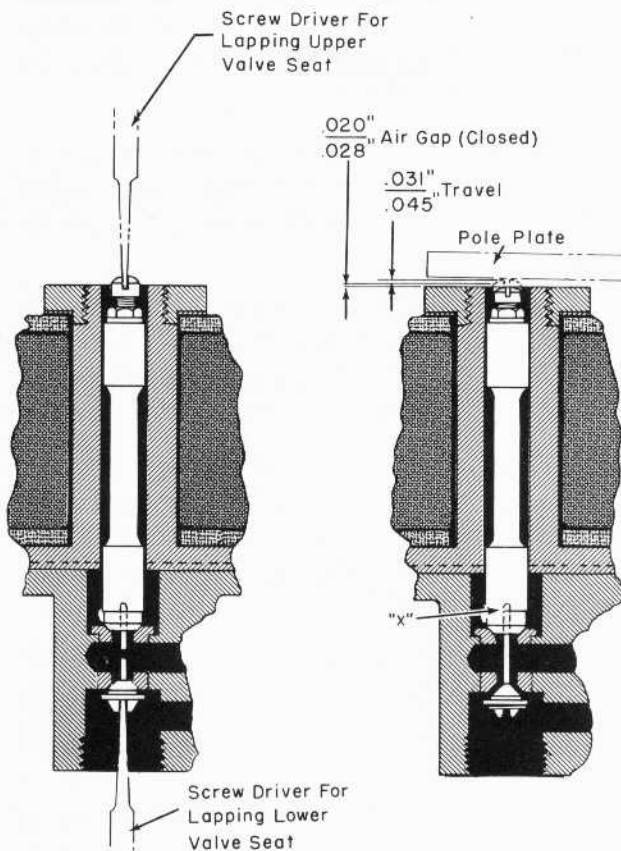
Grinding And Adjustment Of Magnet Valve 8089175
